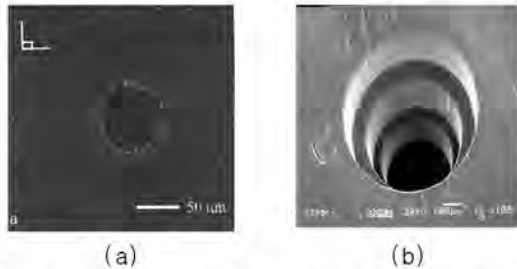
Laser processing for micro-hole of (a)Cu sheet, and (b)Cu-PI-Cu sheet
